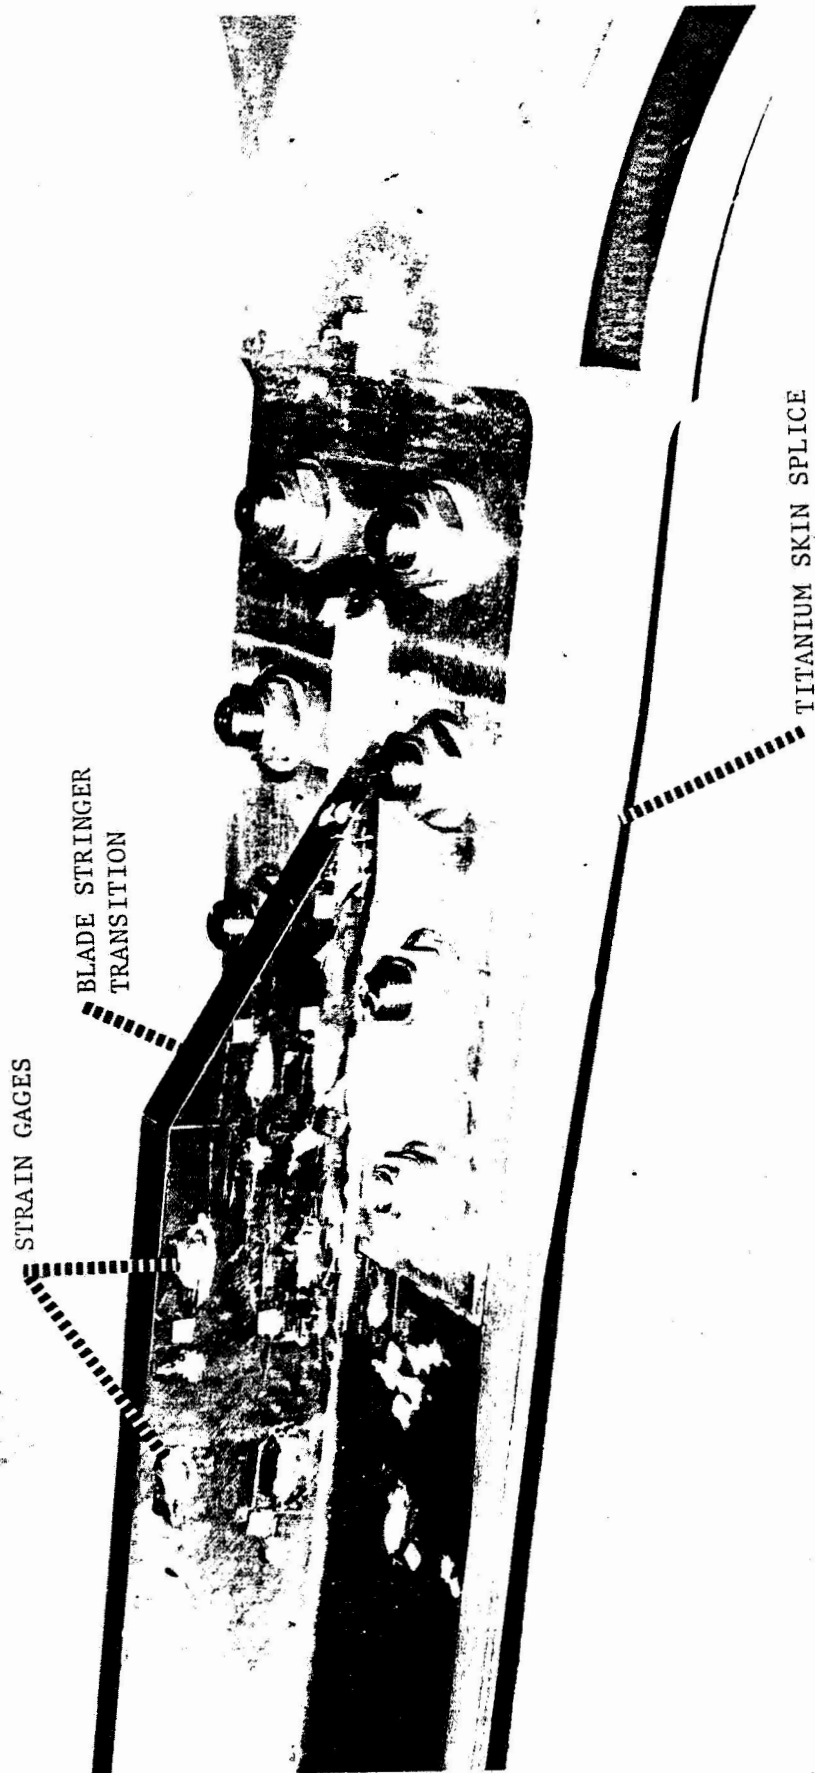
STRINGER JOINT TEST SPECIMEN
